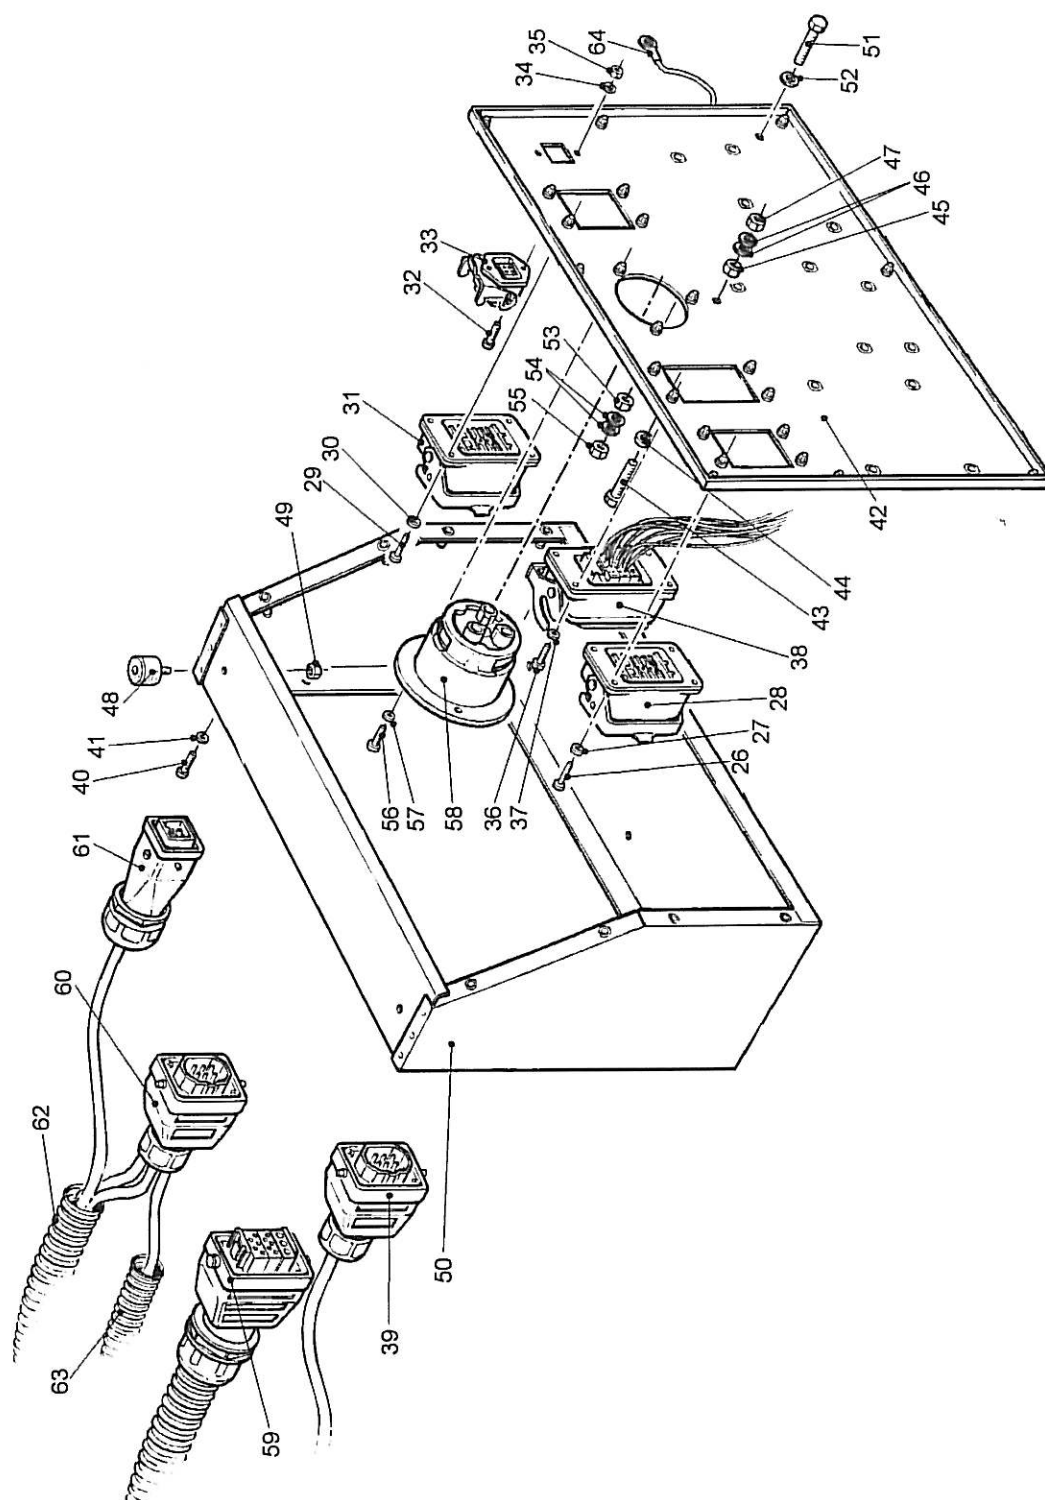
CONTROL BOX ASSEMBLY (SHEET 2)
